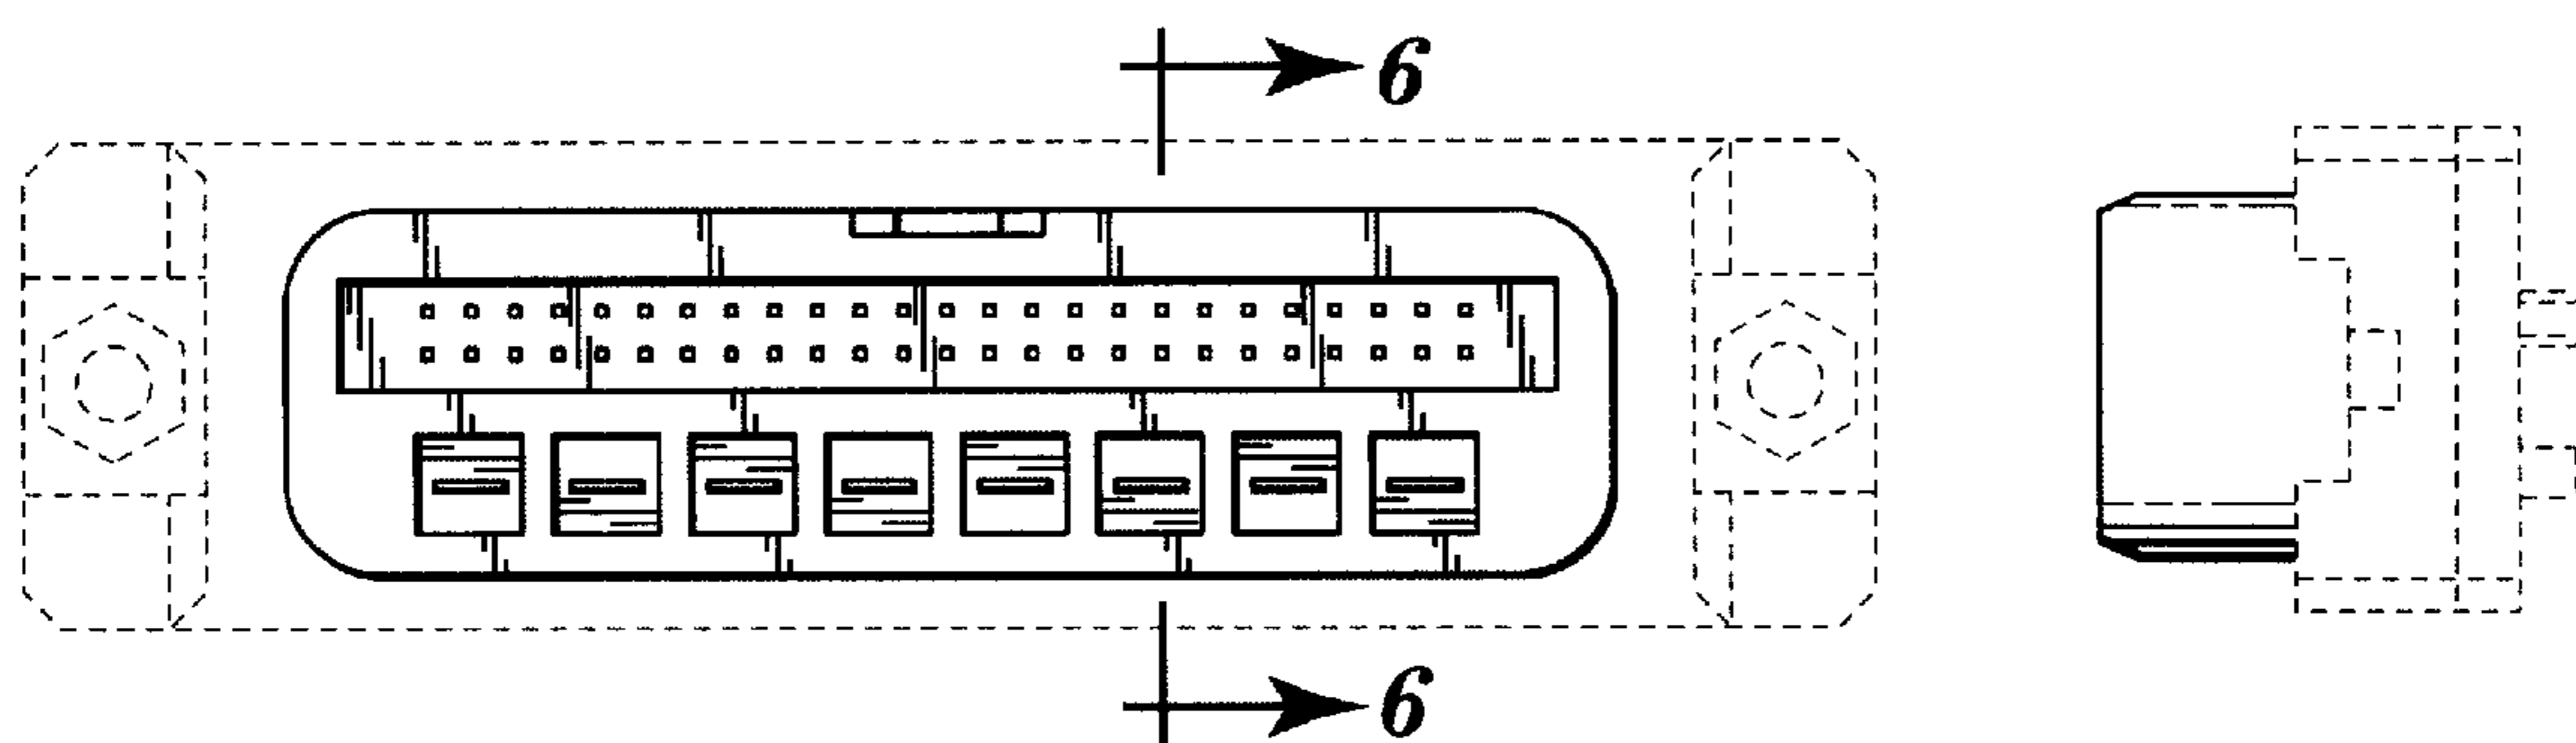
is a top side view of the board mount connector of FIG. 1.
